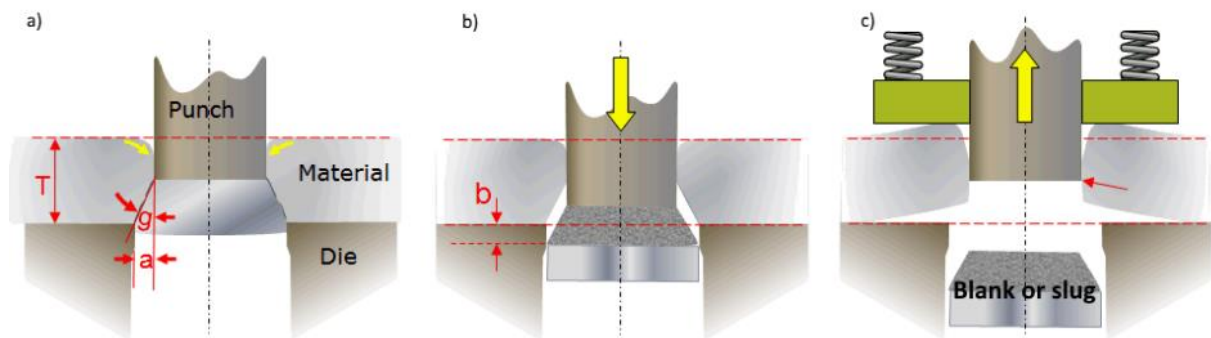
Illustration of the punching process. The punch is the tool used to create the hole, die is the hold holding the material up, blank or slug is the piece of material that is cut loose, T is the material thickness, g is the fracture angle, a is cutting or die clearance and b signifies the length of the cut zone of the die. a) "Penetration stage", from initial contact between punch and material until fracture. b) "Fraction stage", the blank is loose. c) "Return stage", the punch is pulled back out. Adapted from internal document belonging to Benteler.
